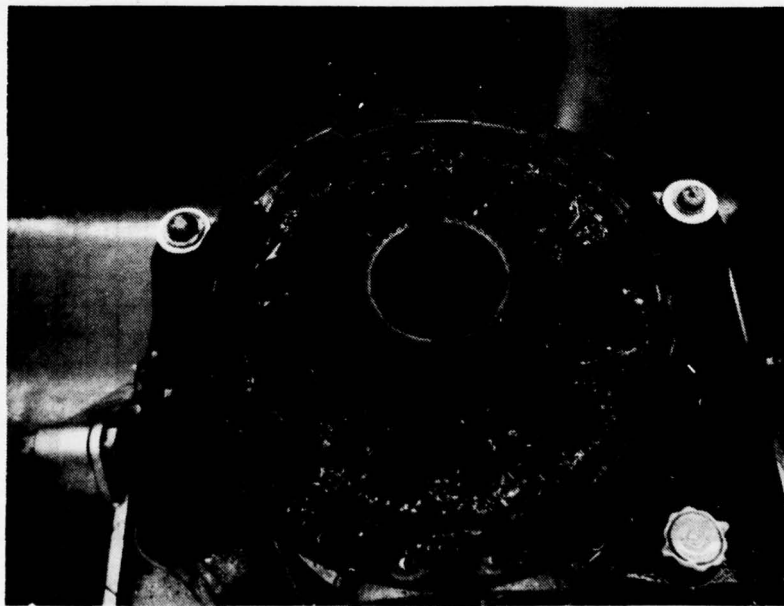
Gearshaft support case with oil collectors prior to removal from lower transmission assembly after fourth loss-of-lube test.
